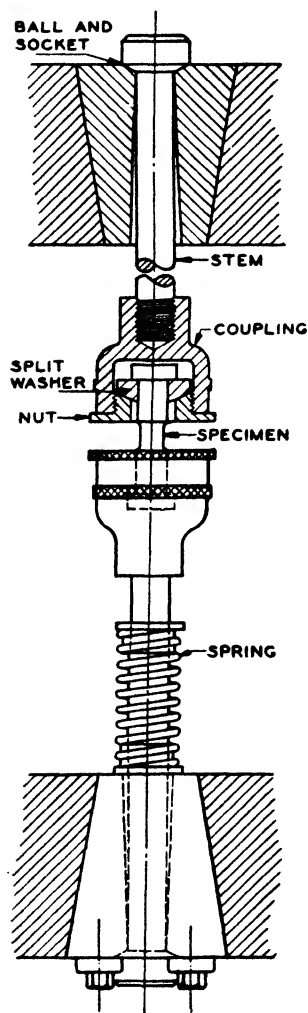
HOLDERS FOR TENSILE TEST SPECIMENS
